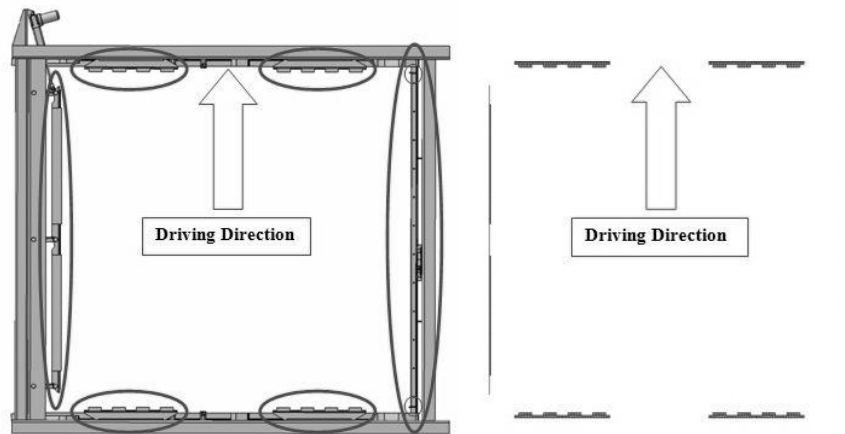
CAD Model and Meshed Contact Surfaces Topview
